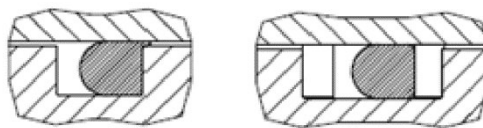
O-rings may extrude (left), backup rings prevent extrusion (right)
